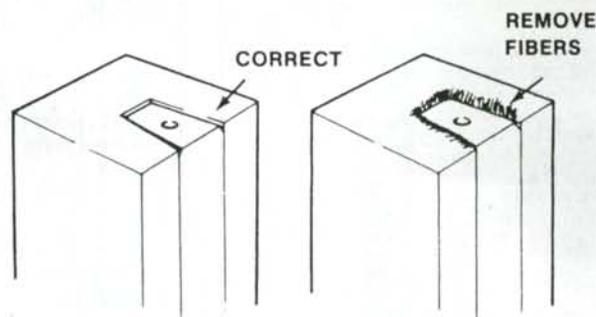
Remove loose fibers from ends of crankshaft rear seal packing using a sharp knife or razor blade. DO NOT cut off ends of packing.
